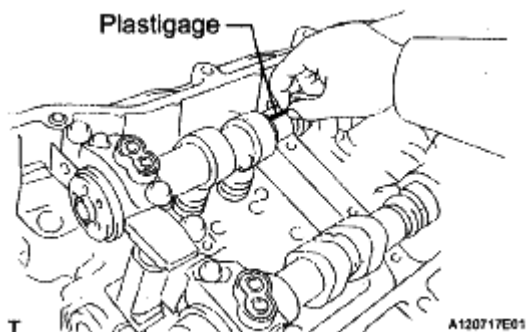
Laying Strip Of Plastigage Across Each Of Camshaft Journals
